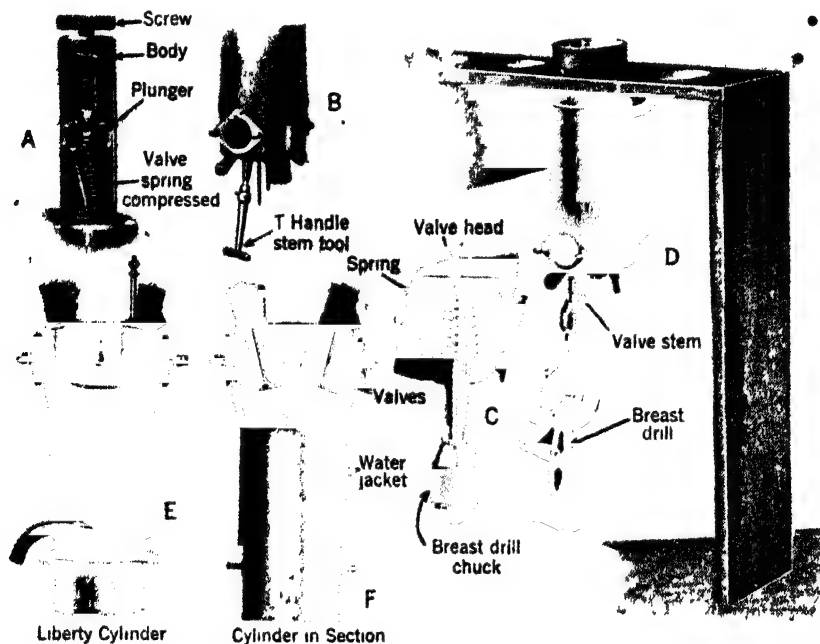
The Liberty Engine Cylinder and Method of Grinding the Valves. The View at A Shows Special Valve Spring Compressing Tool in Use.
